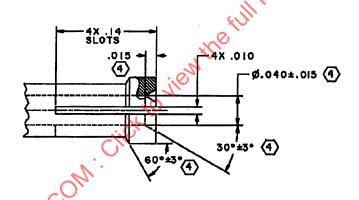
CONTACT, ELECTRICAL CONNECTOR, PIN, CRIMP REMOVABLE, SOCKET, SINGLE WIRE.
